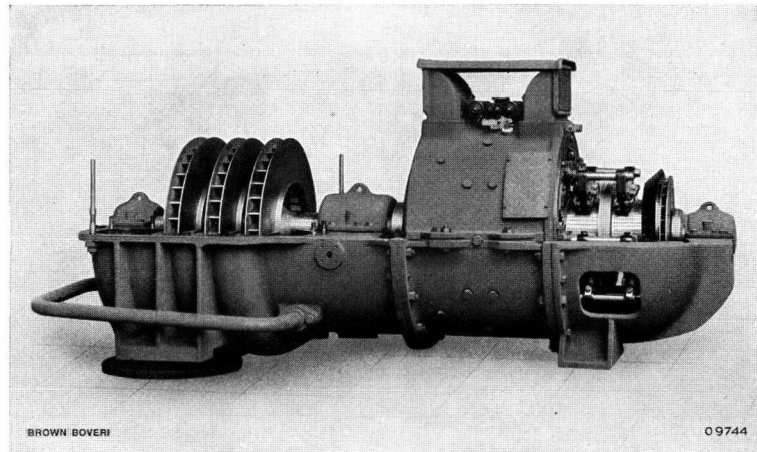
The same blower as in Fig. 3, with top half casing removed.
